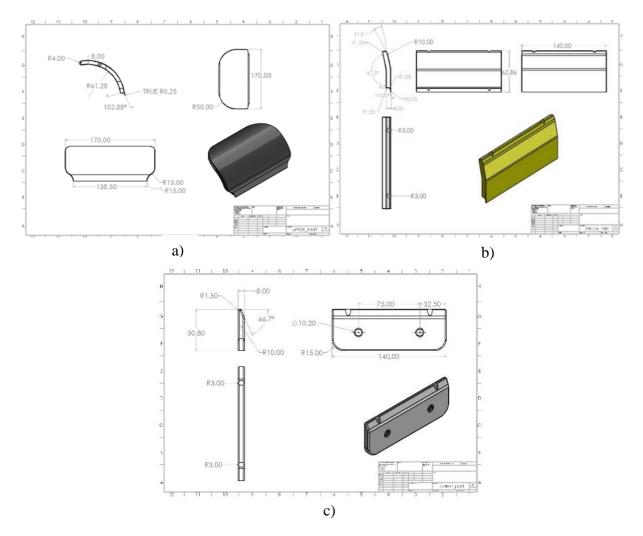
Design of the safety device using SolidWorks a) top part, b) middle part, c) bottom part
